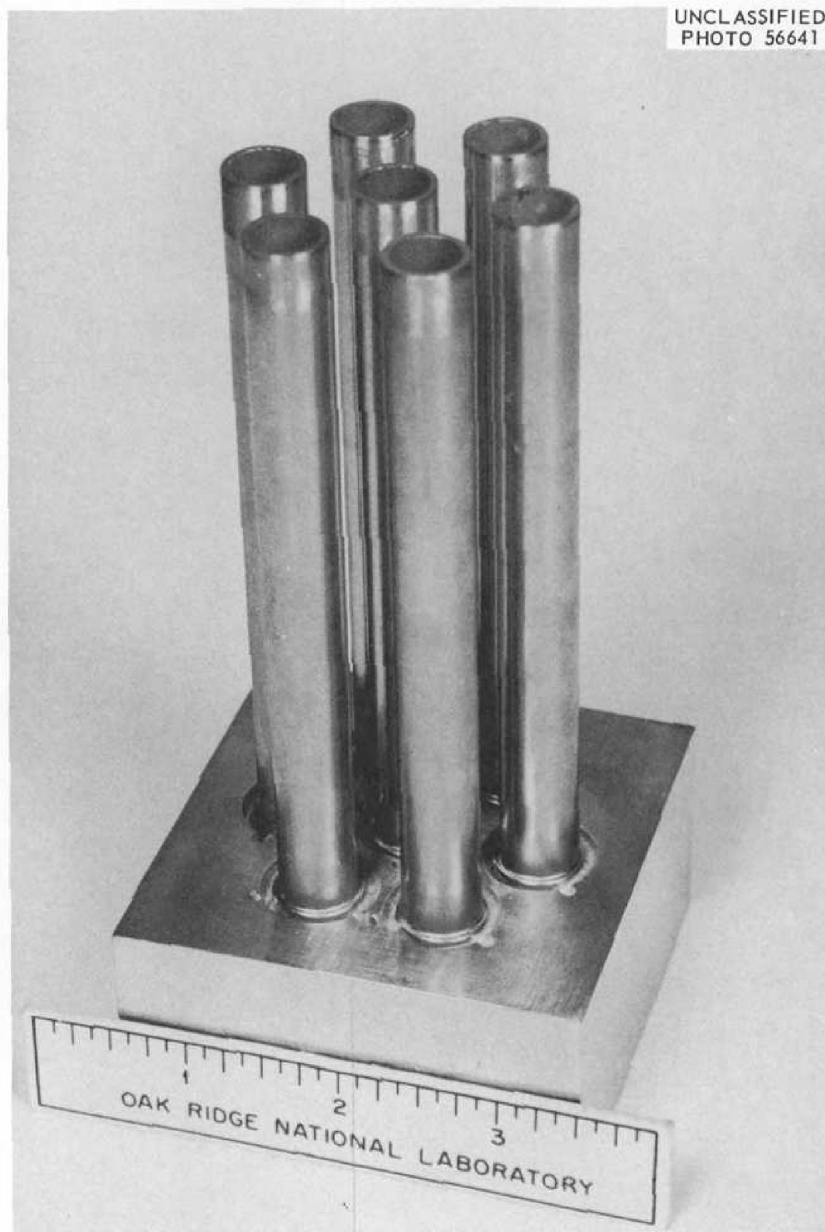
Seven-Tube Braze-Cycle Test Specimen.
